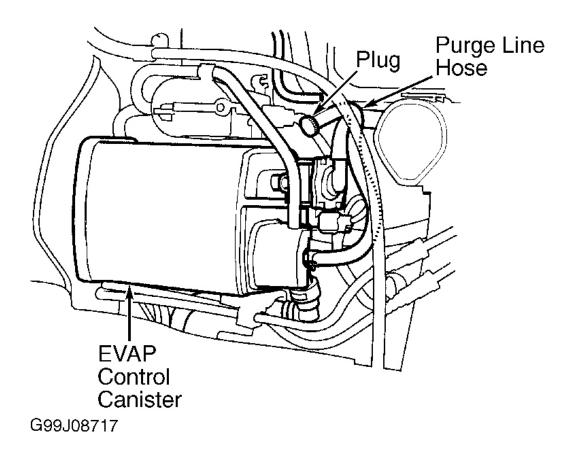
Disconnecting Purge Line Hose From EVAP Canister Courtesy of AMERICAN HONDA MOTOR CO., INC.
